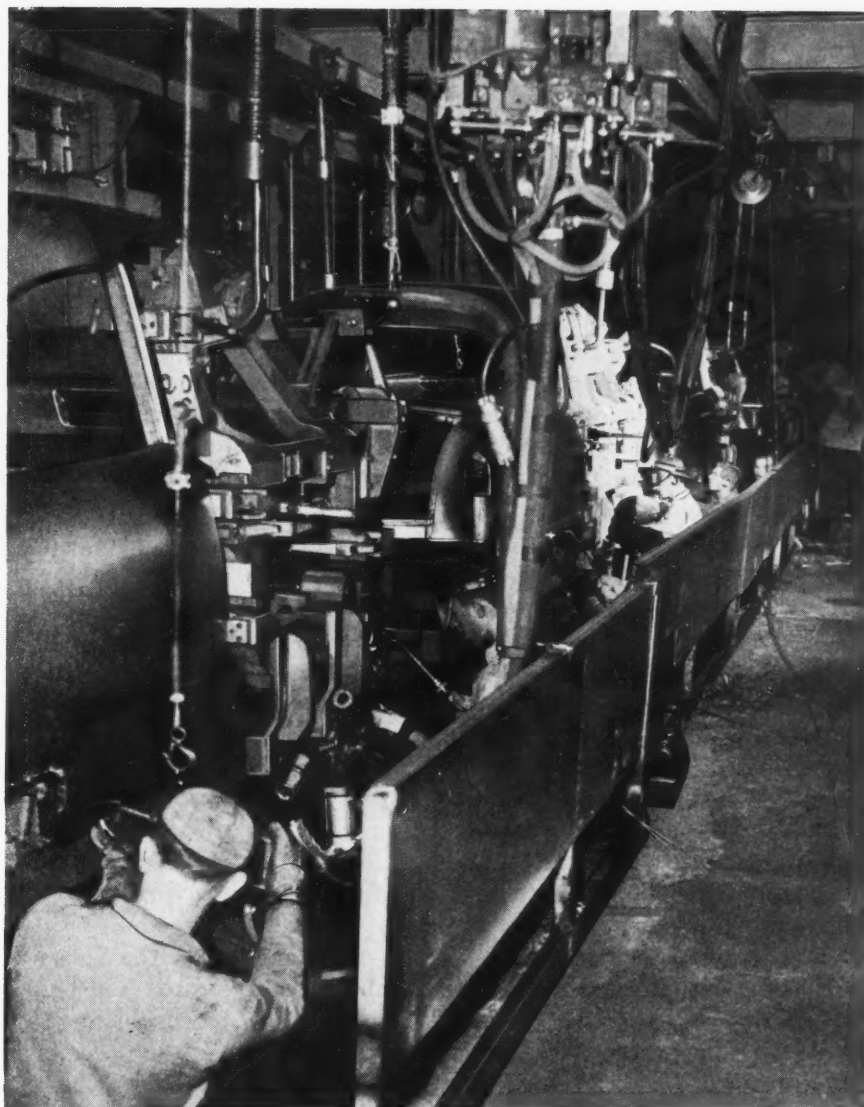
Rear view of the framing buck, Fig. 9. Six welding operators complete twelve bodies per hour on each of five fixtures
